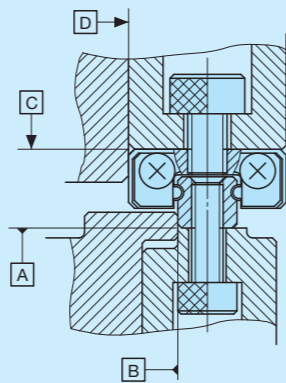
Reference mounting surface of size 2, 3, 4 and 6 series and typical mounting structure
